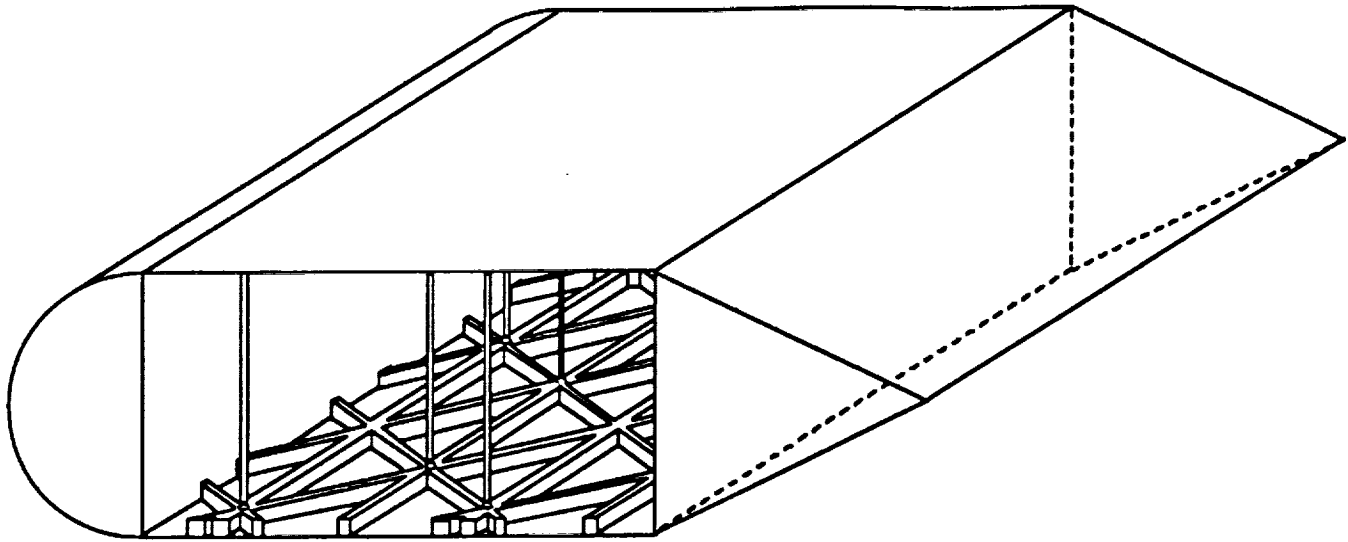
shows the Vertical Column Support type of rib structure. This style of rib is attractive because it is easily joined to the proposed grid stiffening structure of the wing box. Due to the method of constructing the grid structure, convenient points of attachment for the columns are created. To minimize the restraint of rib on chordwise deformation, it is proposed to use universal joints to attach the columns to the grid. The grid structure needs to be sized such that the columns can be placed at the proper spanwise intervals so that they support the covers against general instability buckling modes.
